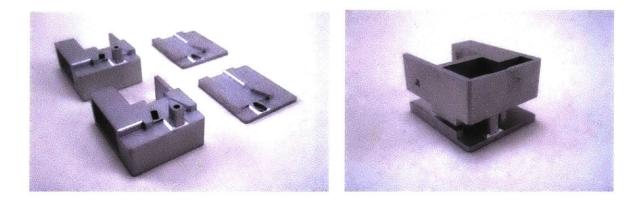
Two sets of machined aluminum Zipperbot two-part chassis before second operation assembly showing internal zipper slide geometry (left) and assembled Zipperbot chassis (right).
